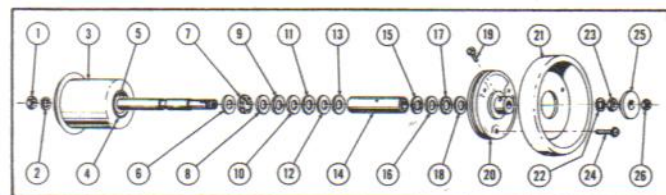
SHIM PROCEDURE FOR ASSEMBLING TURNTABLE SHAFT
